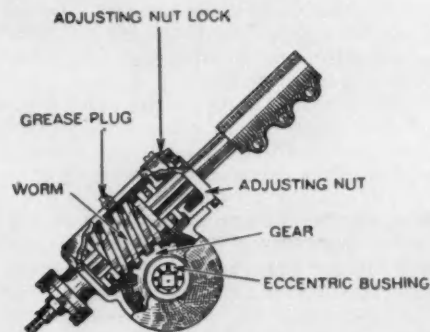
Worm and worm-wheel steering gear was common among early reducing gear types. Gears were contained in a frame-mounted cast gearbox.
